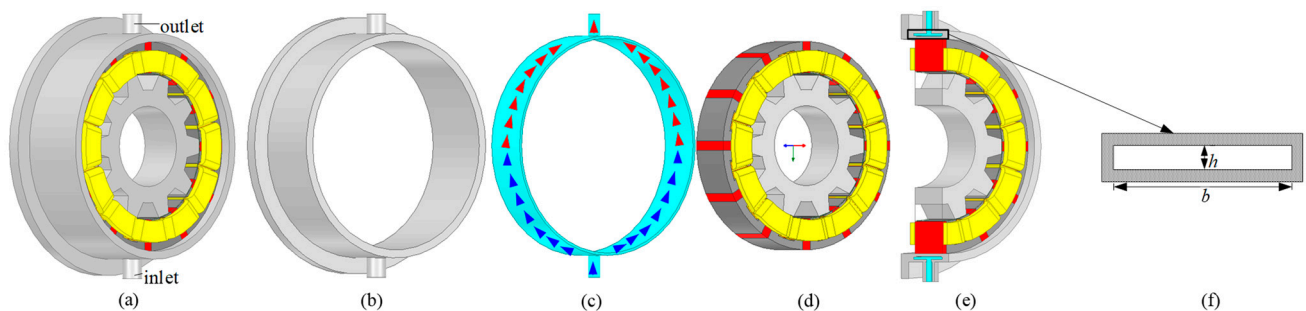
The cooling system of the FSPM machine. (a) FSPM machine structure, (b) housing, (c) coolant flow path, and (d) machine assembly. (e) Cross-section of the cooling jacket, and (f) schematic diagram of cooling duct.
